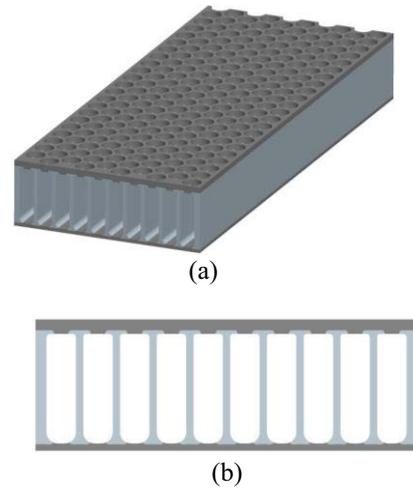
The W-base plate, (a) a bird view, (b) a front view
